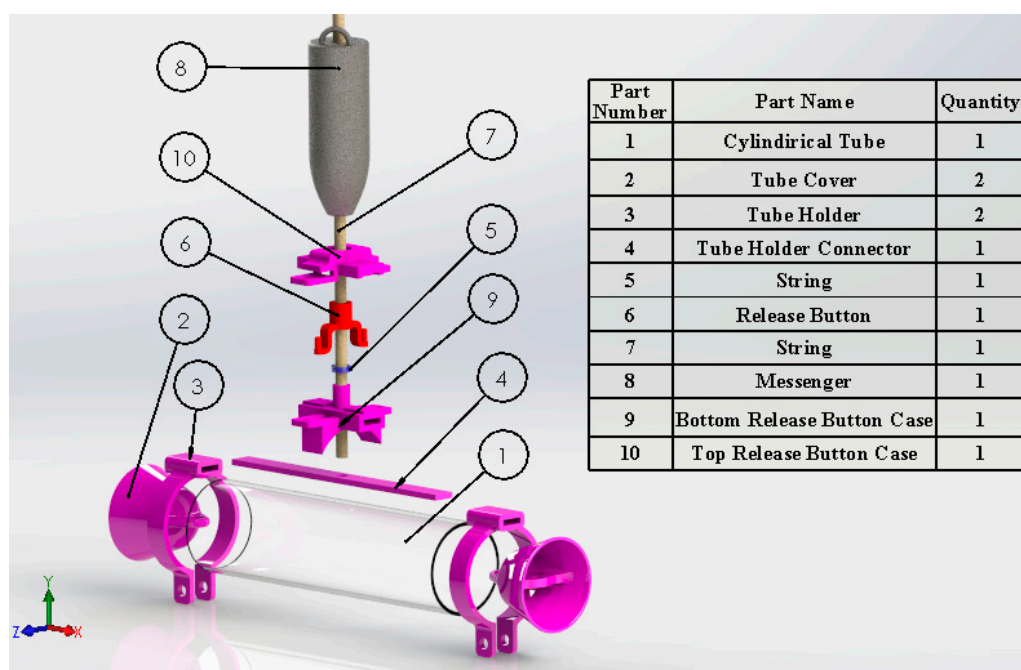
Three-dimensional perspective view of the FWCM and its components.
